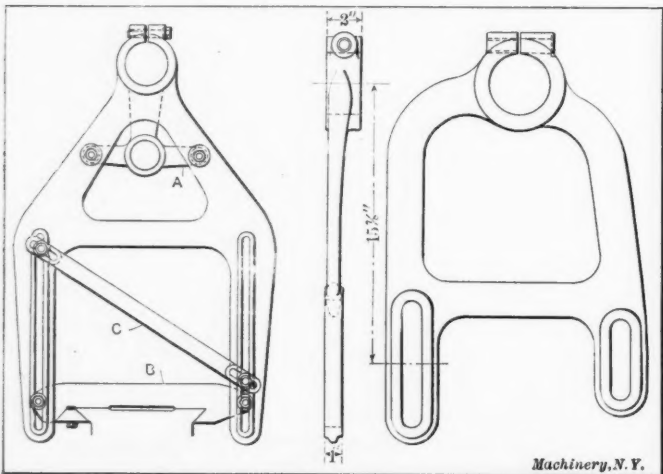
Truss Form of Bracing. Fig. 15. Brace with Curved Slots
